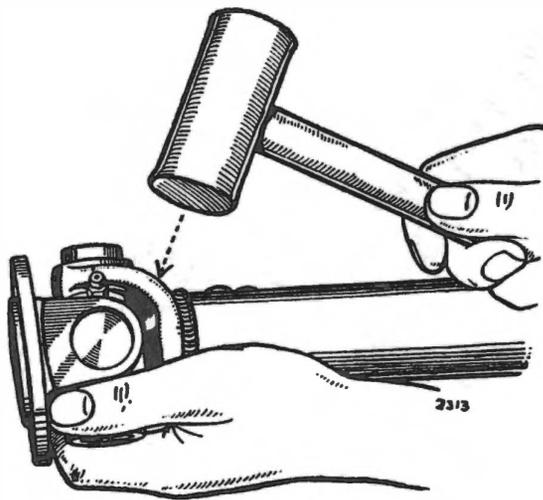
To extract bearings after removal of snap ring, tap on ears of yoke with copper hammer
